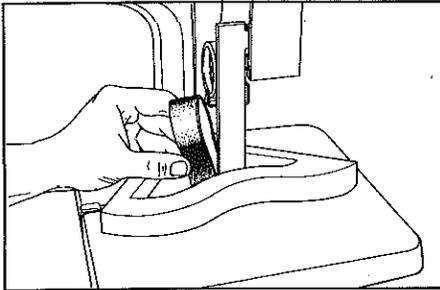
Insert the belt up through the holes in the table and the workpiece.
